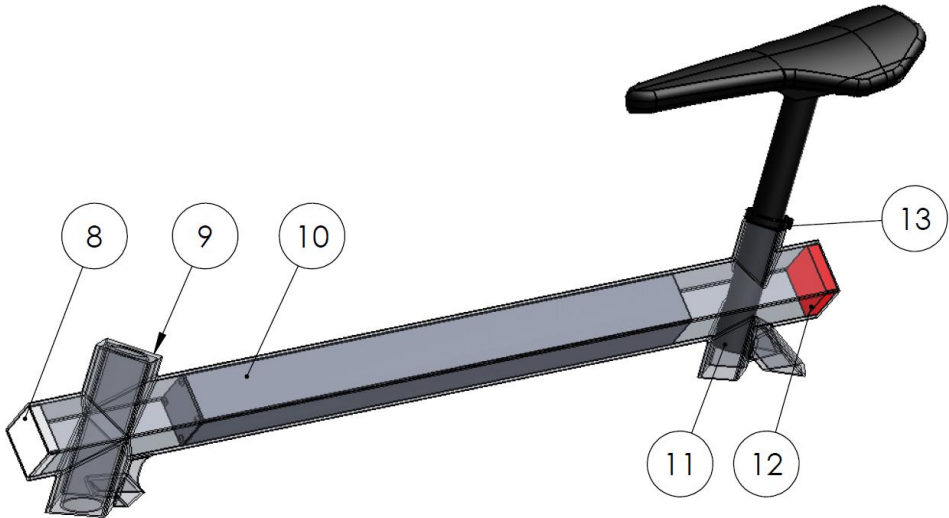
Bicycle top tube and electronics integration. 8 - front light integrated into top tube; 9 - head tube; 10 - battery and electronics enclosure (See fig. 6.6. for exploded view); 11 - seatpost; 12 - rear light; 13 - seatpost camp.
